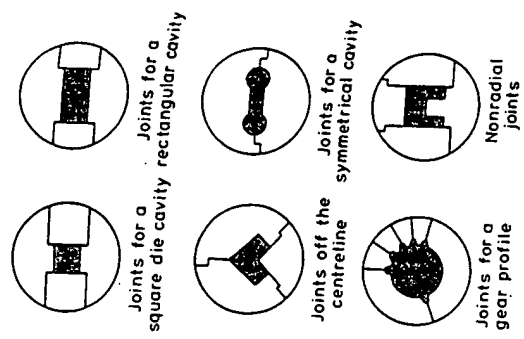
Six examples of die inserts with preferred location of joints for noncylindrical cross-sections of parts.¹⁸ The shaded area is the die cavity.
